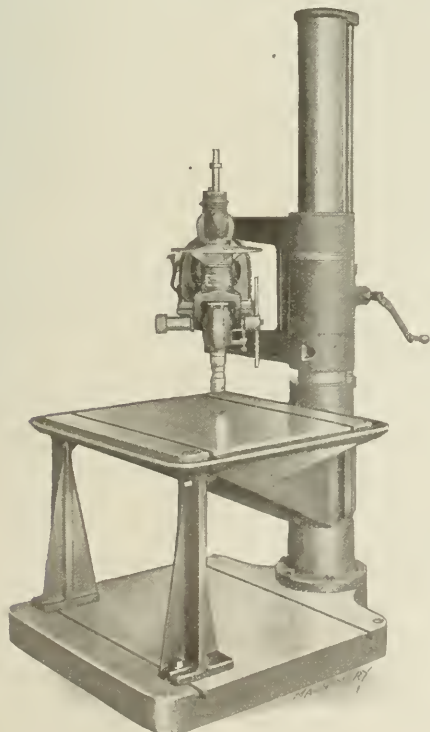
Rickert-Shafer Radial Tapping Machine with Double Arm folded
